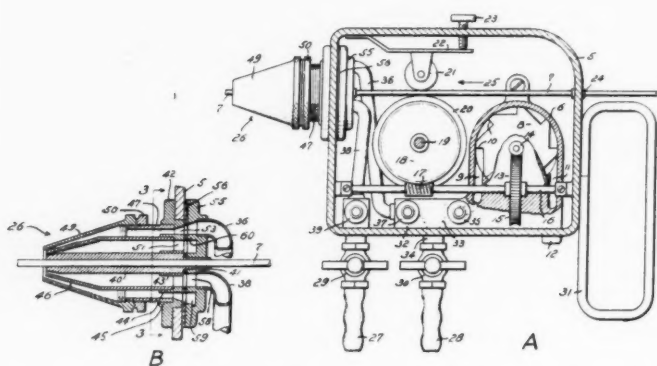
Metal enters gun in rod form, is fed into a gas flame and then is projected by air blast
